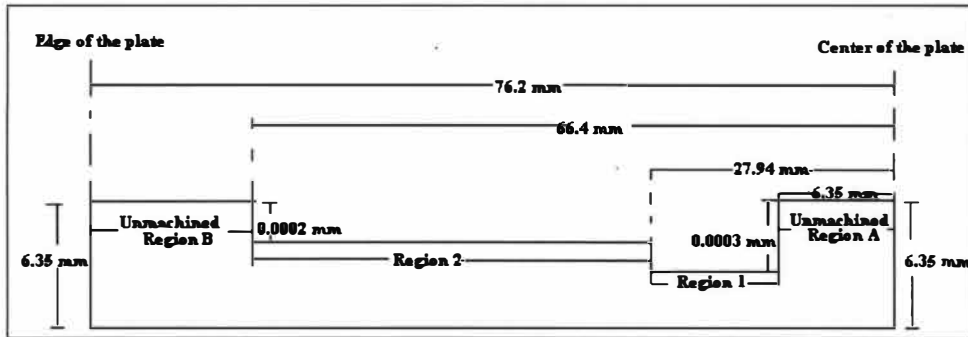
Schematic showing a sectional view of the 6 inch plate comparing the step size for depth of cuts
